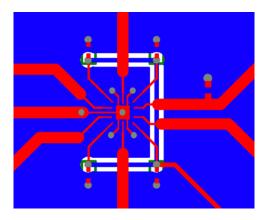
Detail on the chip pattern on PCB of the testing board for Prototype nº 1.
